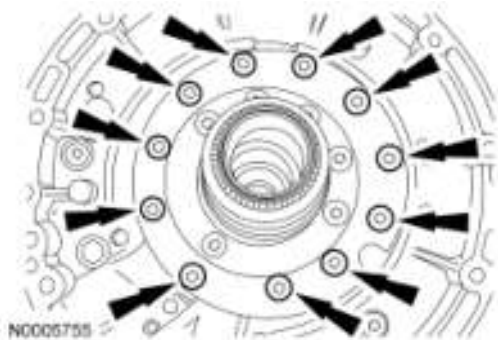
Locating Plate Assembly To Pump Body Bolts
